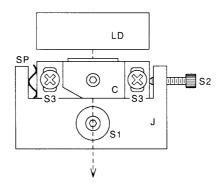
Jig usage in collimation. LD=laser mounting block (Fig. 2), C=collimating lens mount (Fig. 3), J=alignment jig (Fig. 3). SP = spring or rubber pad to provide a restoring force against adjusting screw S2.
